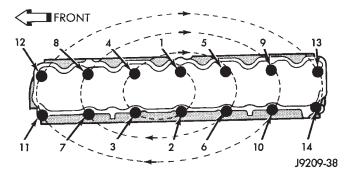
Cylinder Head Cover Gasket Locator Pins at #8 & #9
